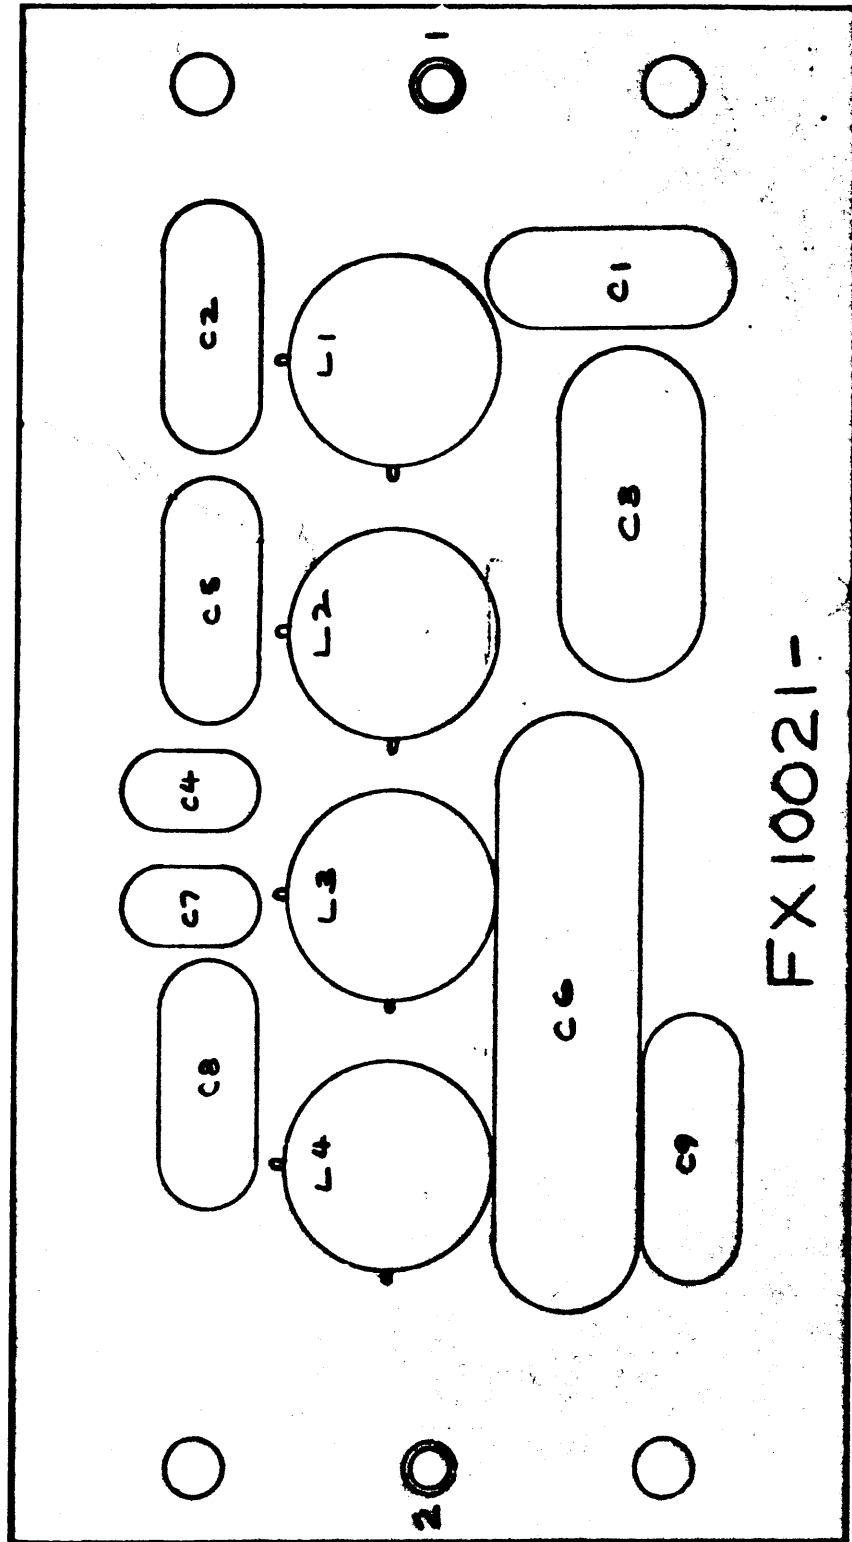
COMPONENT LOCATION, HIGH PASS FILTER ASSEMBLY
